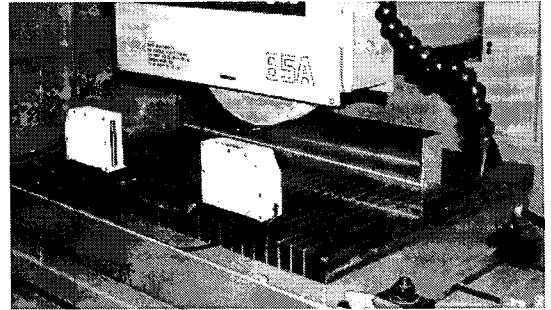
Experimental setup for monitoring of grinding wheel wear in surface grinding machine
